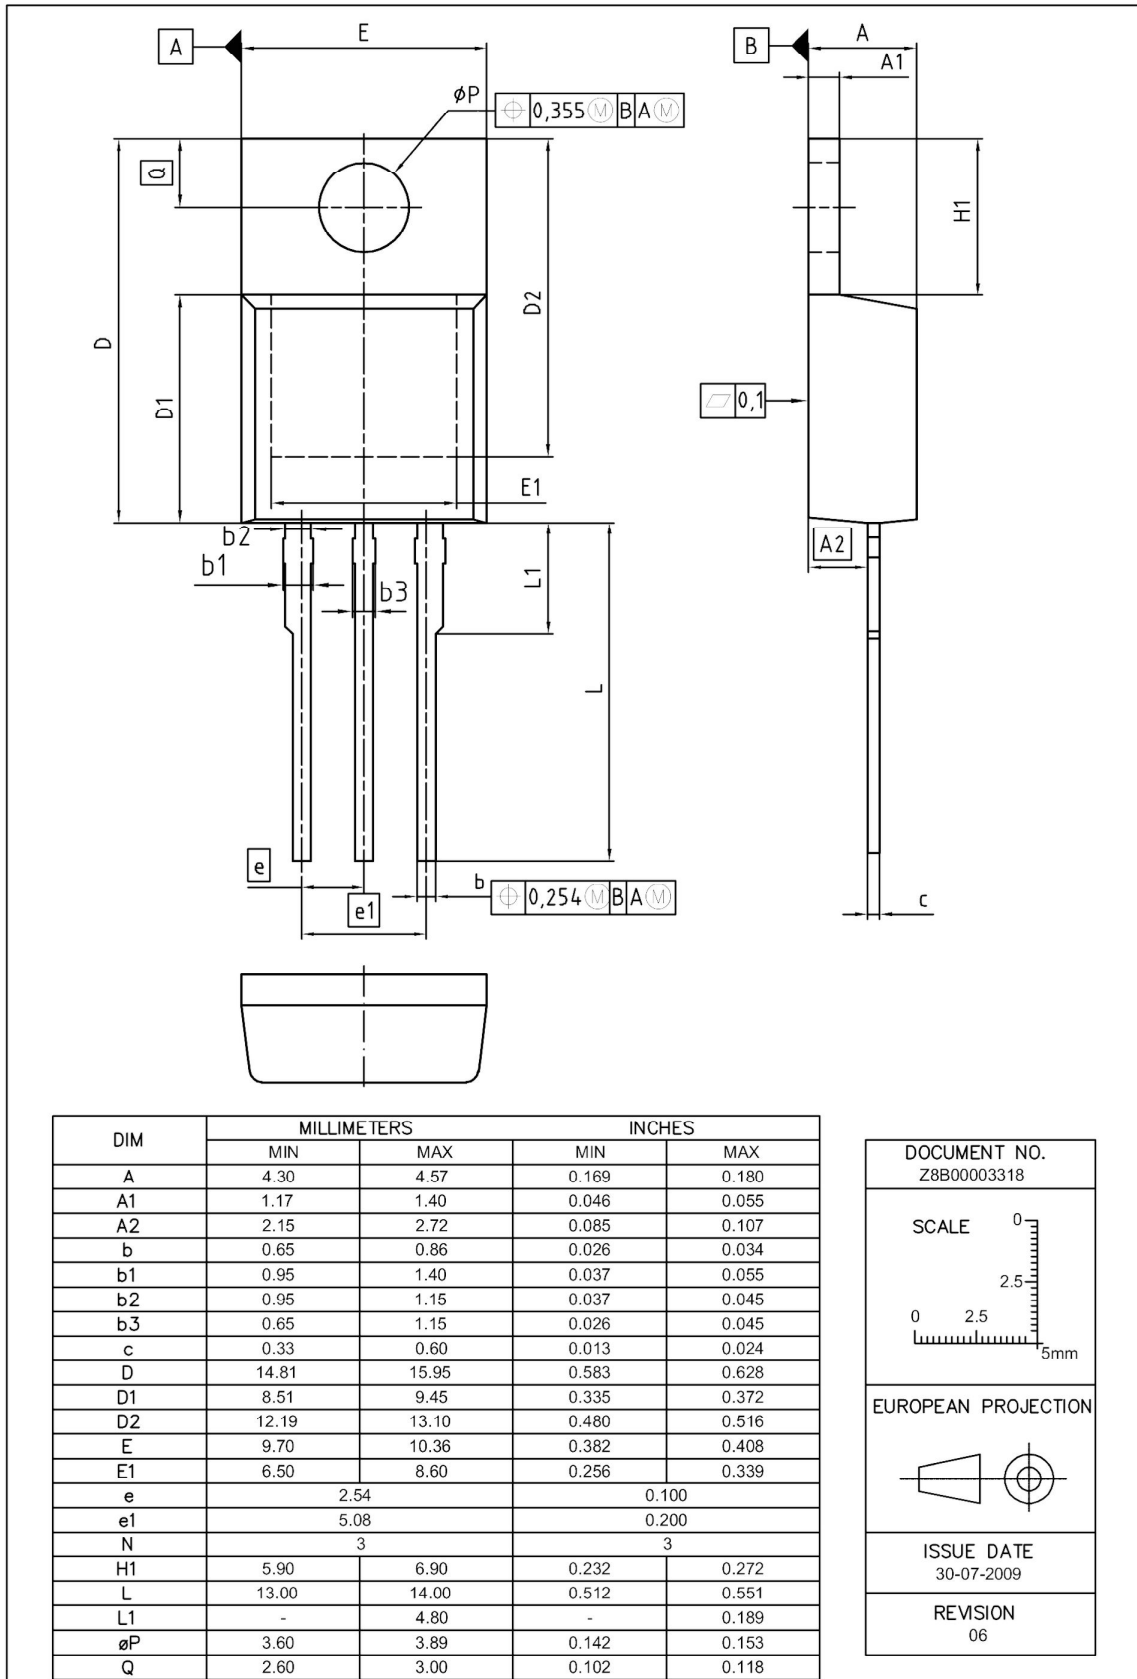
Outline PG-TO 220, dimensions in mm/inches
